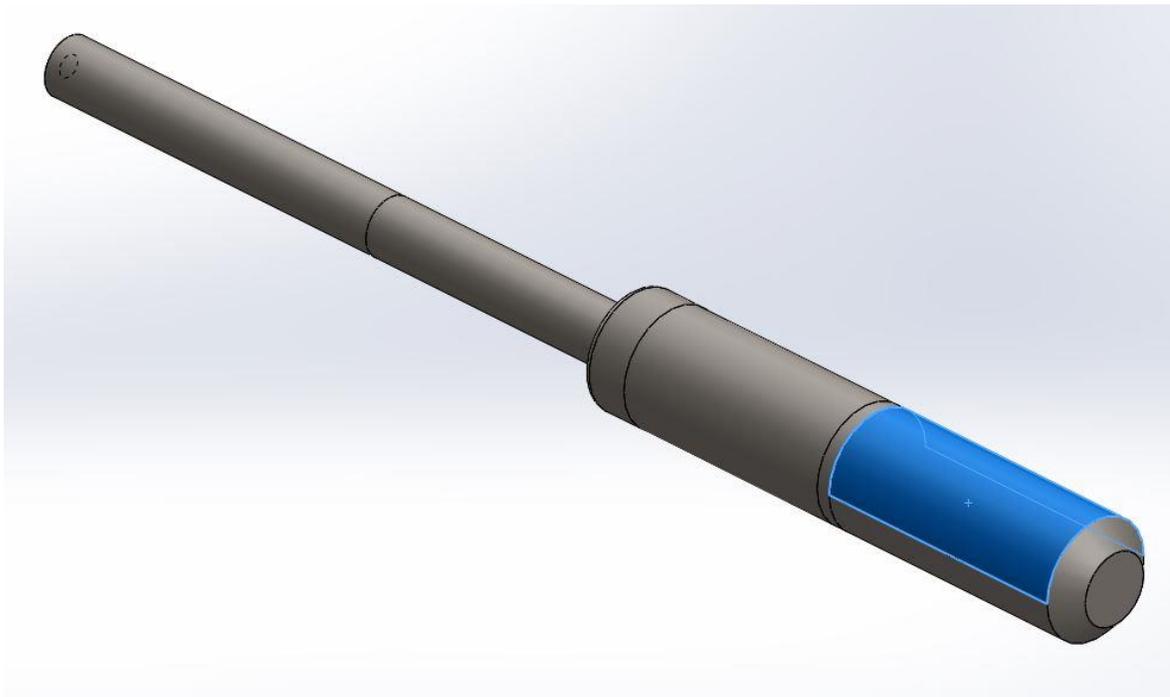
Drive End Shaft, Vertical Downwards Load is Placed on Highlighted Blue Surface
